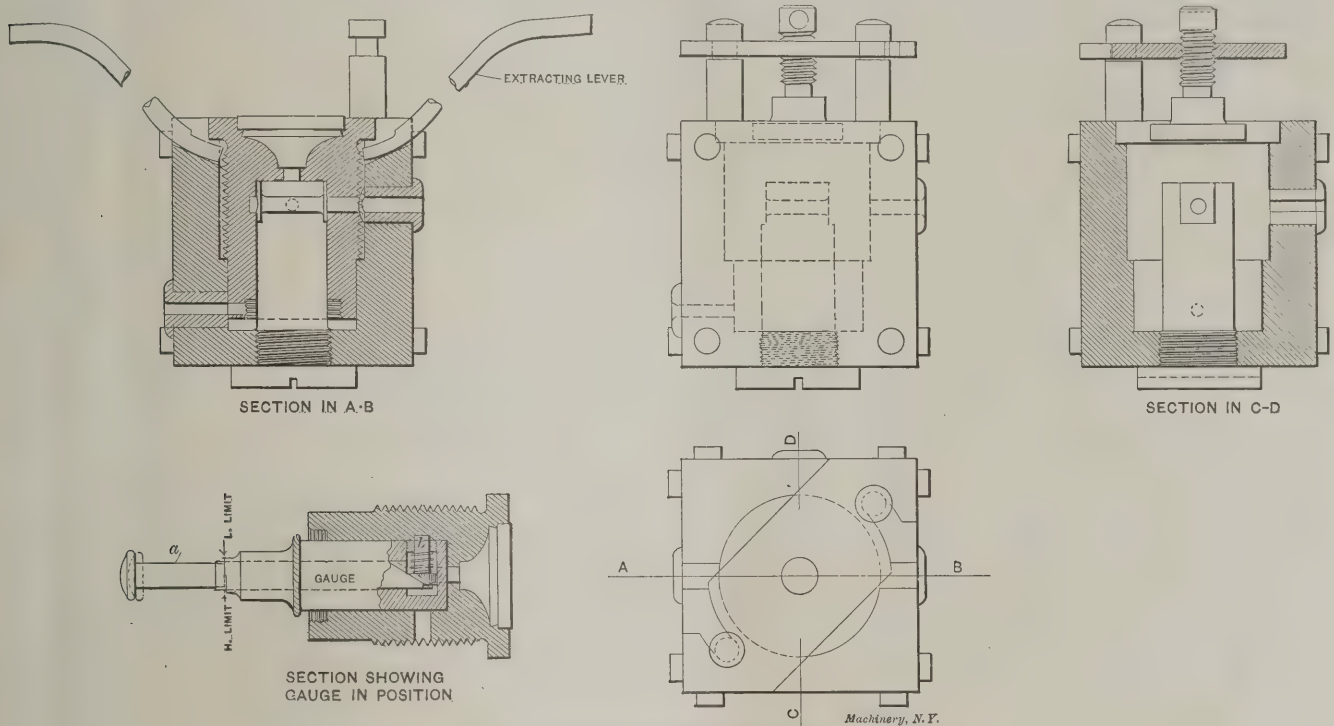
Jig for Drilling Percussion Fuse, and Gauge.
